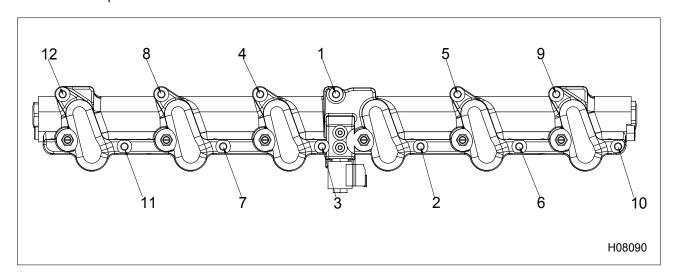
High-pressure oil rail bolt torque sequence (typical)
